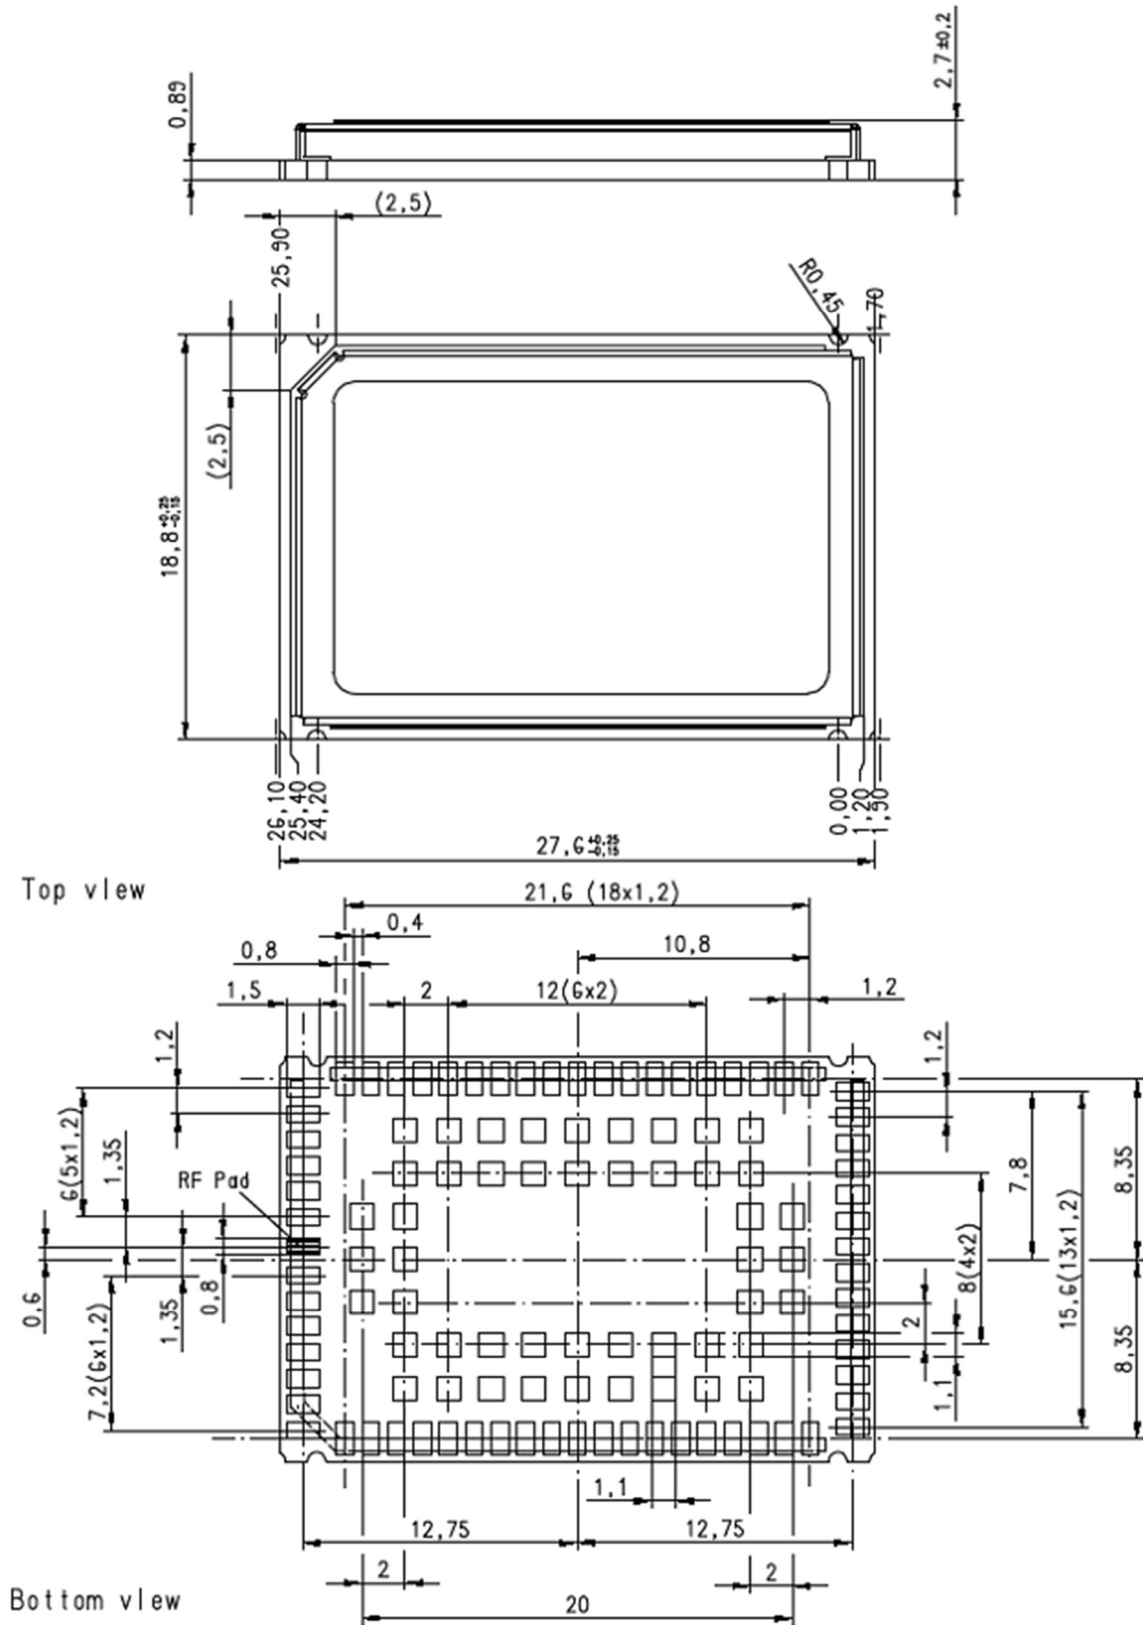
Dimensions of BGS12 (all dimensions in mm)
